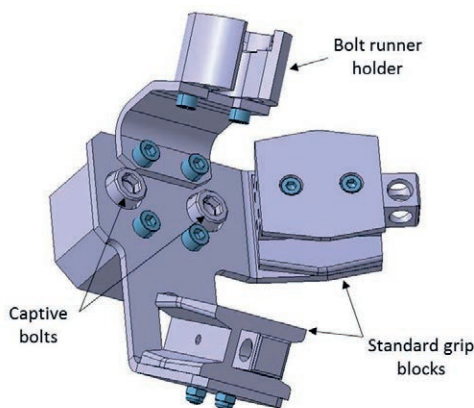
Representation of a generic handling tool which interfaces between a component and the standard MASCOT grip blocks.
